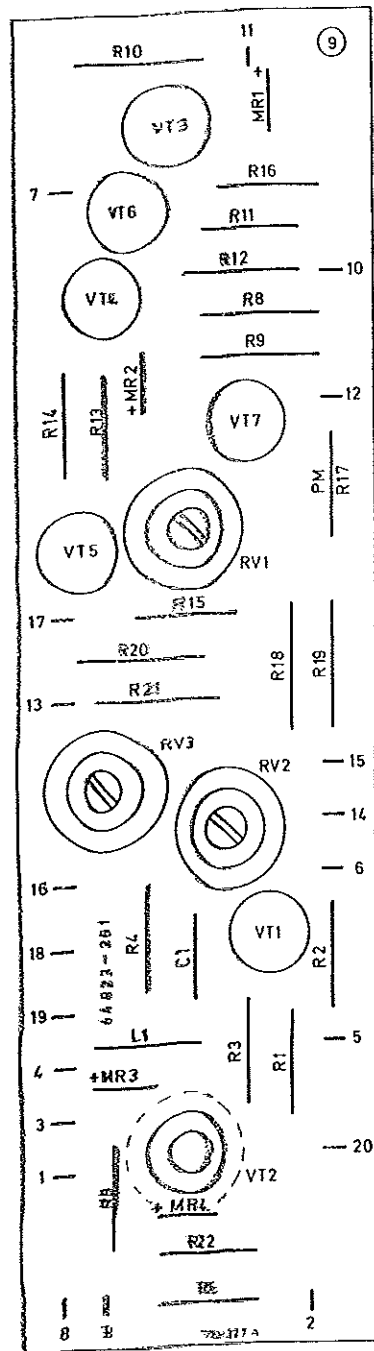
Component location, Board 9, Blanking and ext. drive
